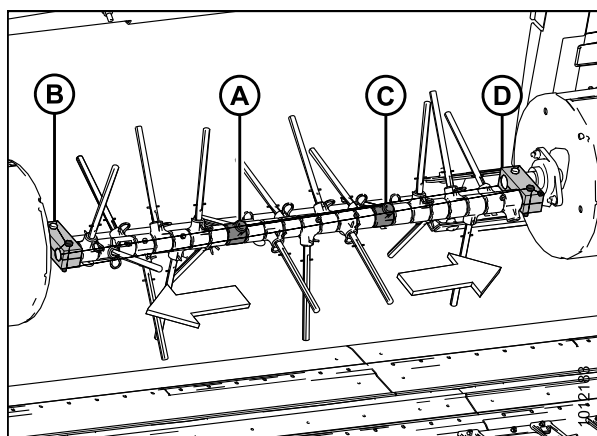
Auger Fingers (Middle Auger Sheet Removed for Clarity)
